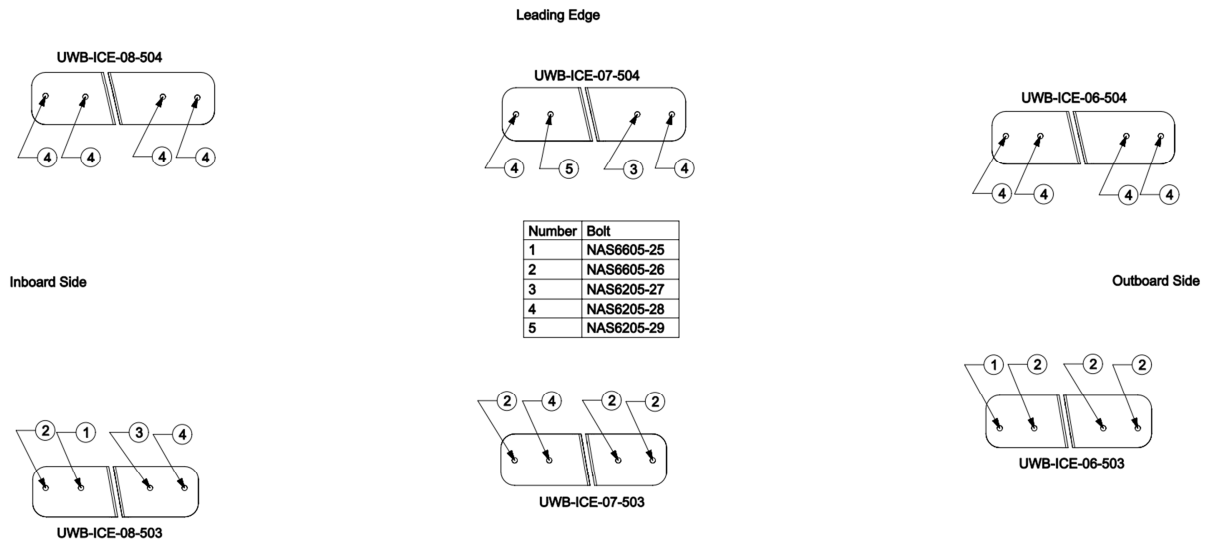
Starboard Wing Upper Pylon Lugs Fastener Placement
